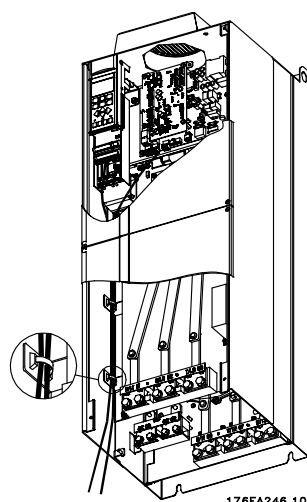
Control Card Wiring Path for Unit Size 43.
